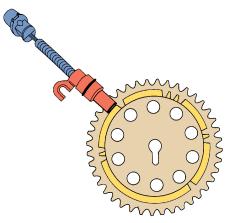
Camshaft sensor and notched cam gear. *Courtesy of DaimlerChrysler Corporation
